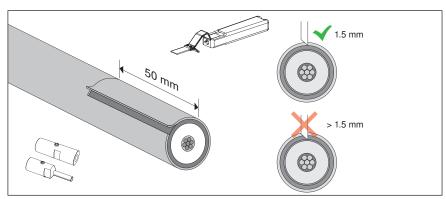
Cutting and removing the grey outer jacket in the contact area
